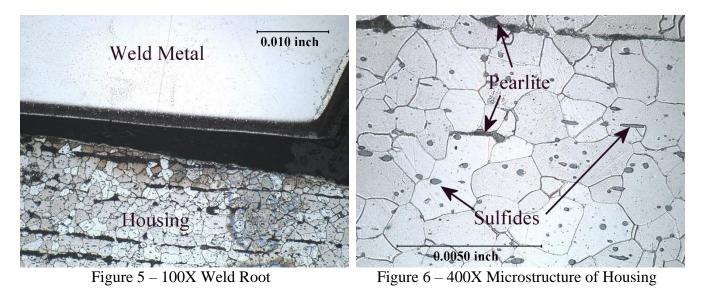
shows a significant lack of fusion in the weld root on the housing side of the weld. The lack of fusion extended for about 50% of the leg length on the housing side of the weld, indicating the weld operator was not qualified for these welds. The lack of fusion was the primary cause of leakage at this location. The weld metal was an austenitic stainless steel. The weld filler metal did not etch, the ferritic nitro-carburized layer did etch, and was found at any location where the weld metal had not bonded to the housing steel.
